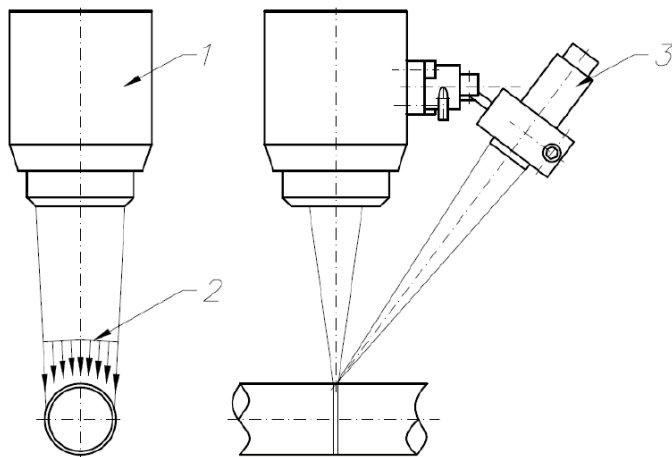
A scheme of laser heating and temperature measurement system: 1 – laser head, 2 – laser beam, 3 – pyrometer
